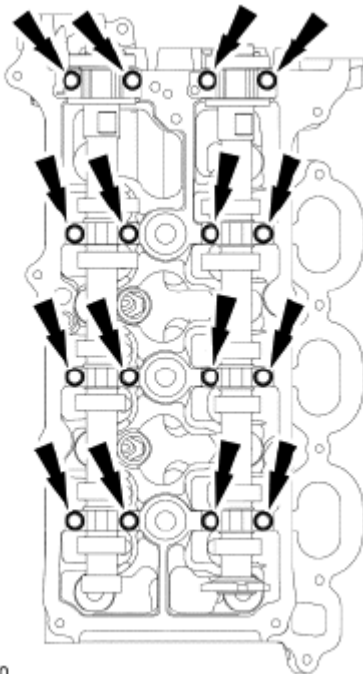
Locating LH Camshaft Bearing Caps Bolts
